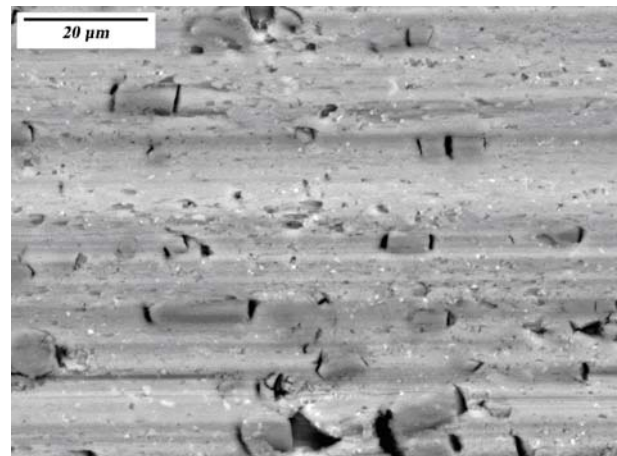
Machined surface of the aluminium composite (cutting parameters: $v_c = 650$ m/min, $f = 0.08$ mm/rev)
